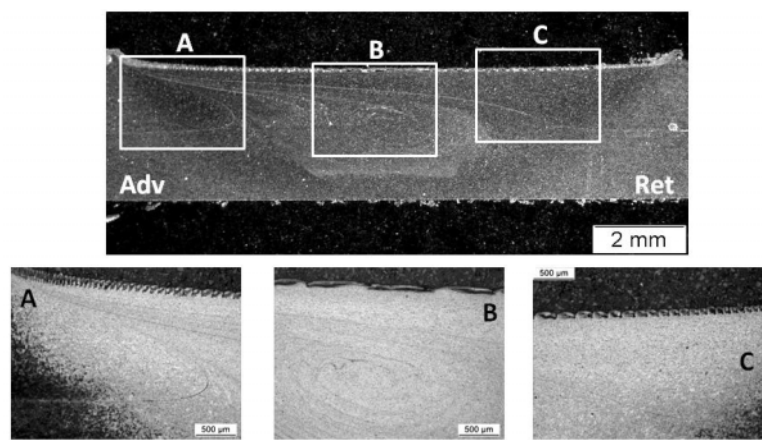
Cross-section of FSW lap joint performed with a threaded - 2,5 mm long probe tool at 1500 rpm - 150 mm/min.
